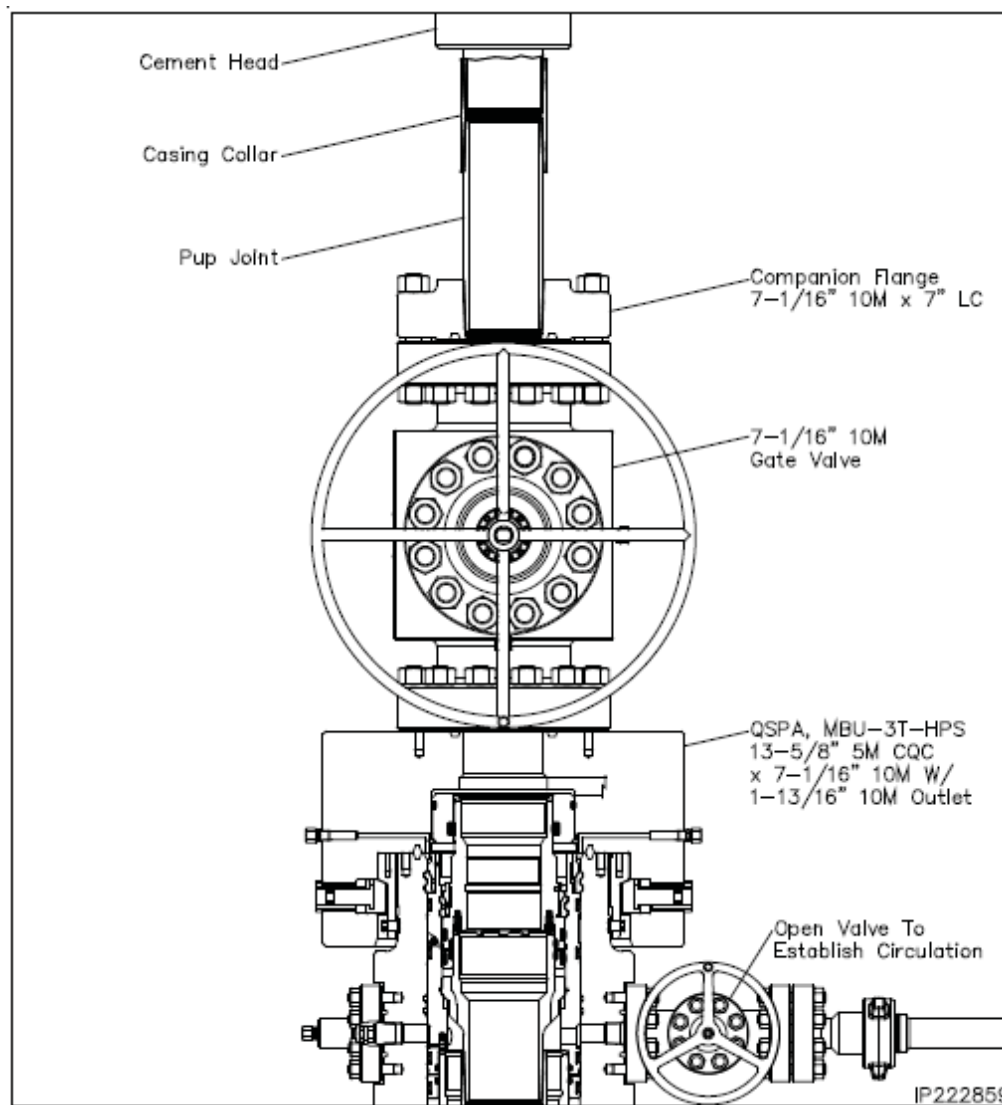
Cactus 7" 5M offline cementing tool. Pressure rating limited by the lesser of 5M tool rating or the 7" pup joint and casing.
